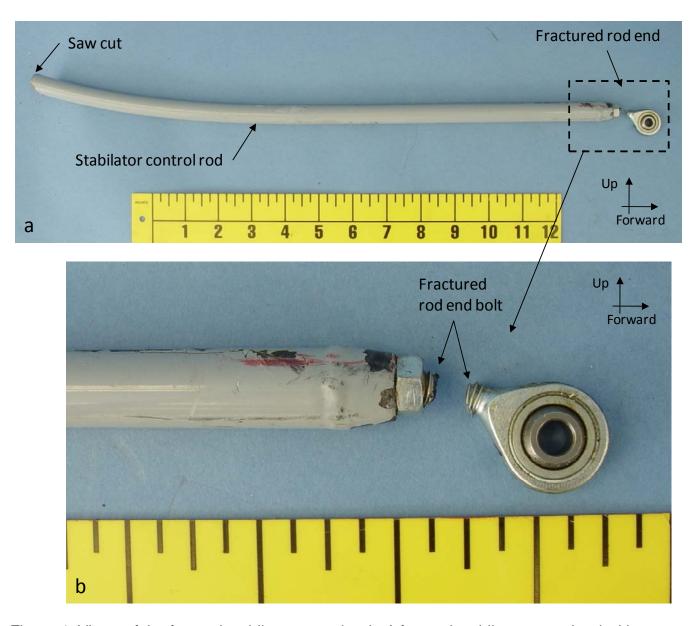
Views of the forward stabilator control rod. a) forward stabilator control rod with fractured rod end. b) close up view of the fractured rod end. The fracture features and thread damage indicate that the rod end fractured in ductile overstress due to downward cantilever bending.
